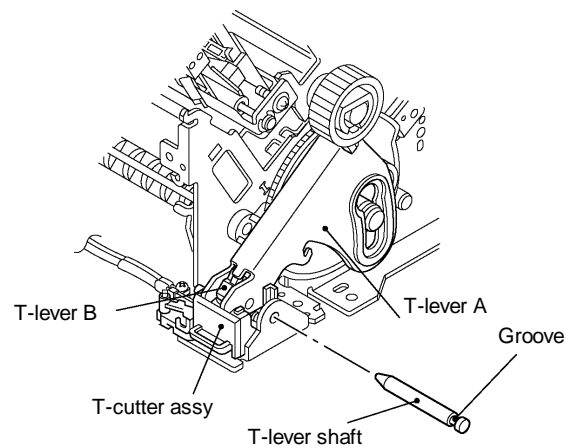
Installing the Right Side of the Chassis 4
